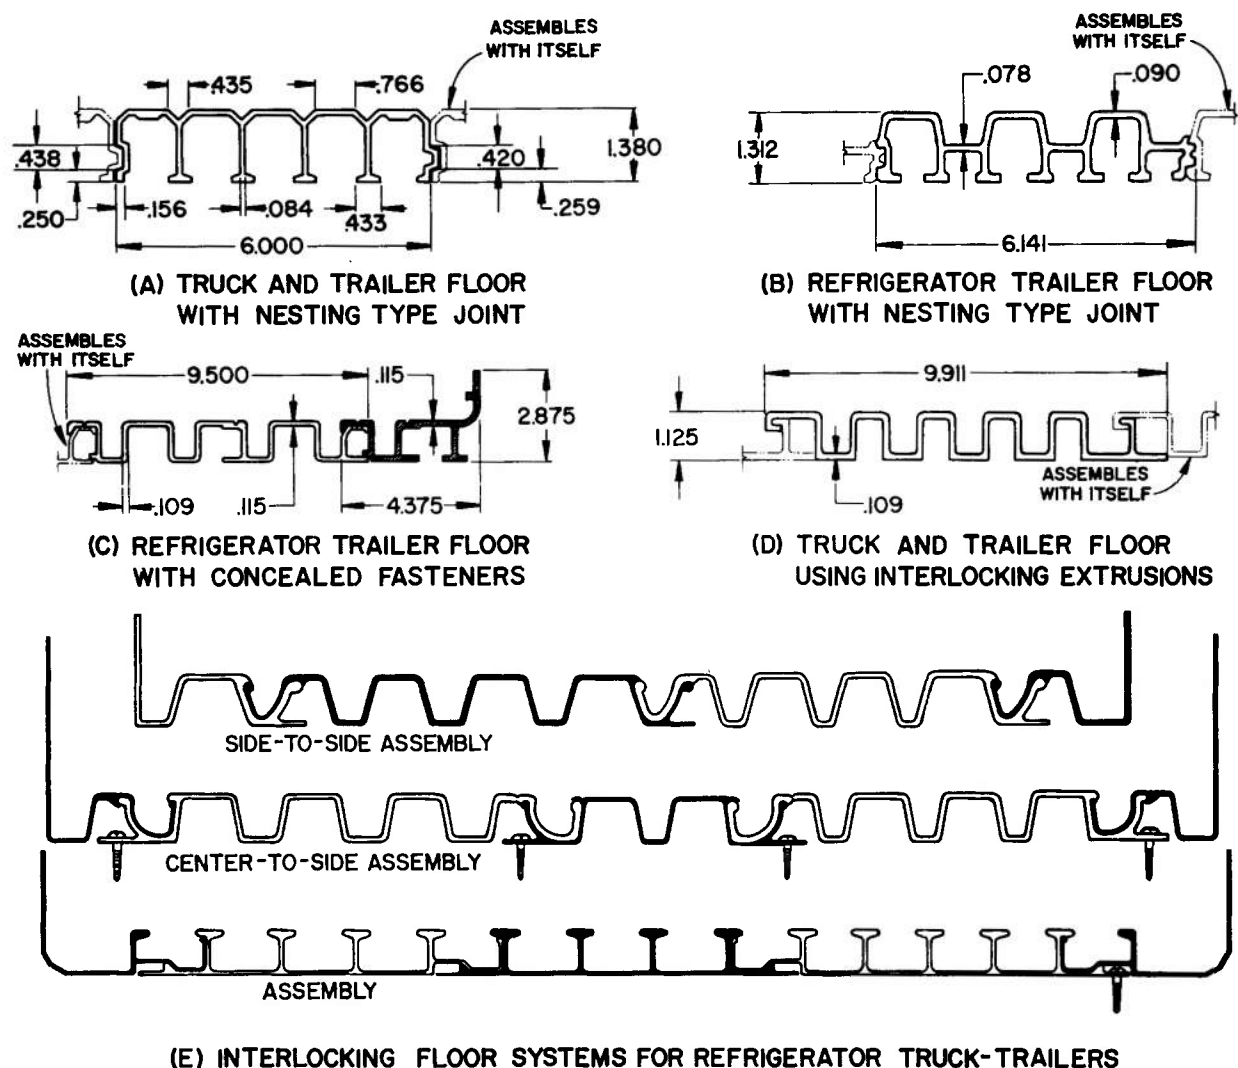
Typical Corrugated and Nonflat-top Aluminum Plank Flooring<sup>72</sup>
